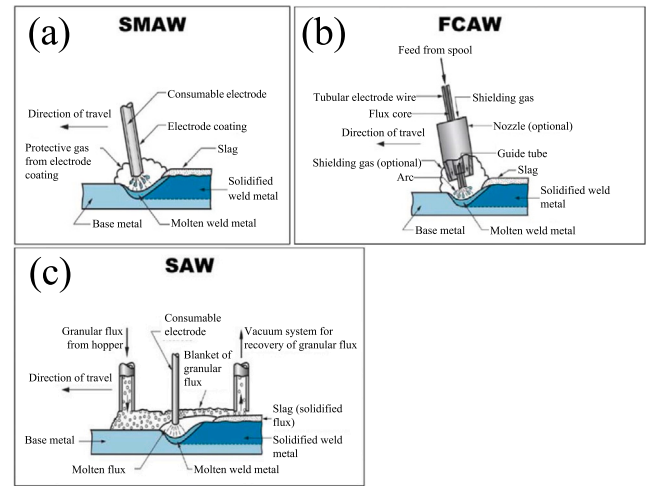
Illustration of the applied welding procedures: (a) Shielded Metal Arc Welding (SMAW), (b) Flux-Cored Arc Welding (FCAW), and (c) Submerged Arc Welding (SAW) [37].
